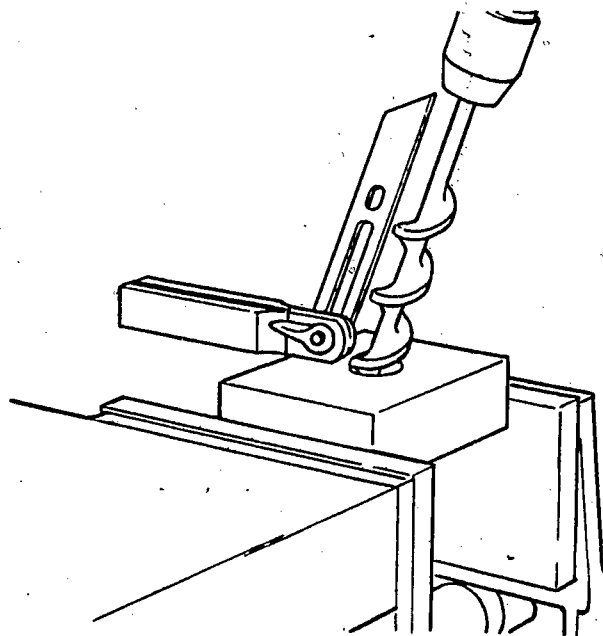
Boring a hole at an angle using a bevel gauge as a guide.
